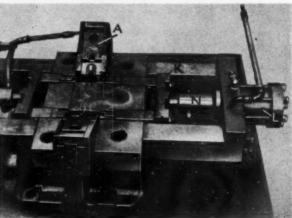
(below). The Fixed Member of the Die for Producing the Brake Magnet Assembly
